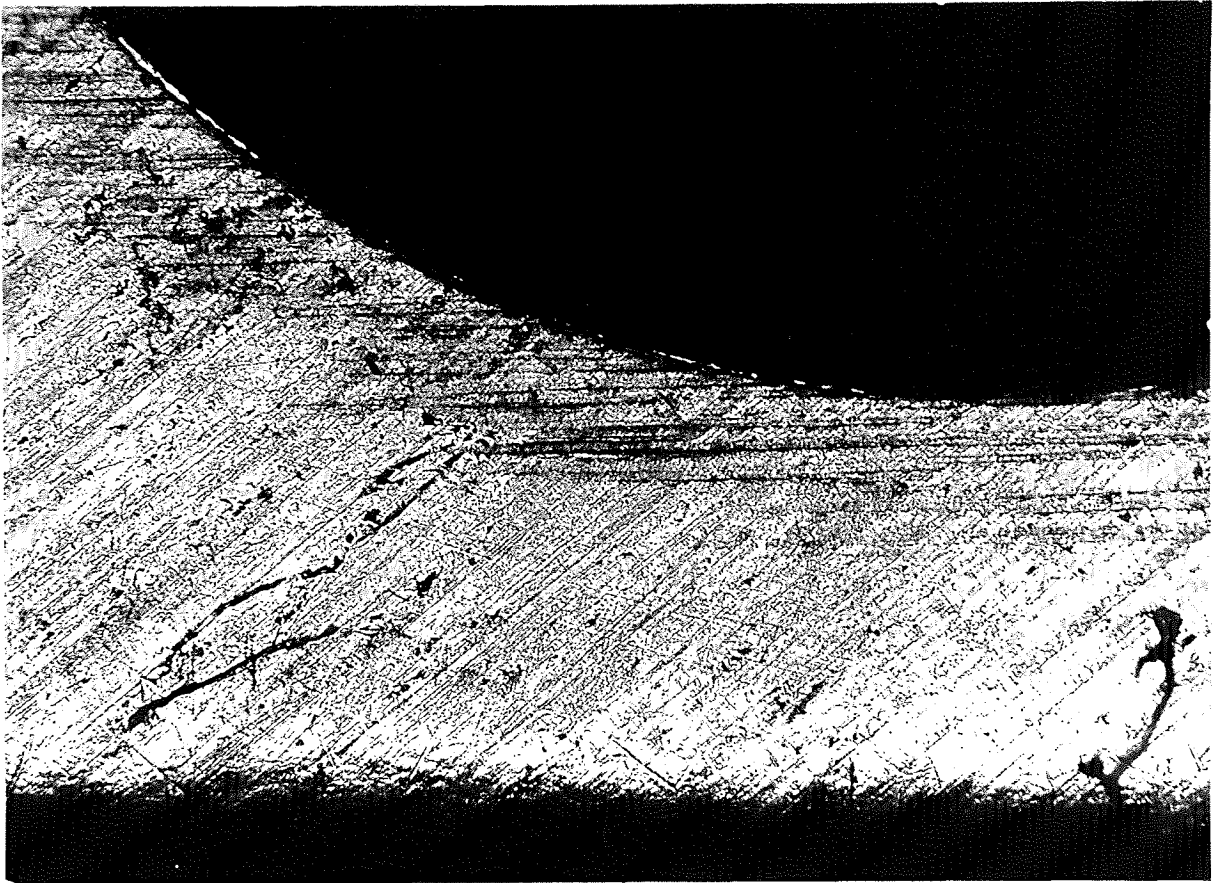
80X, Hole region of nickel silver contact spring before deburring.
